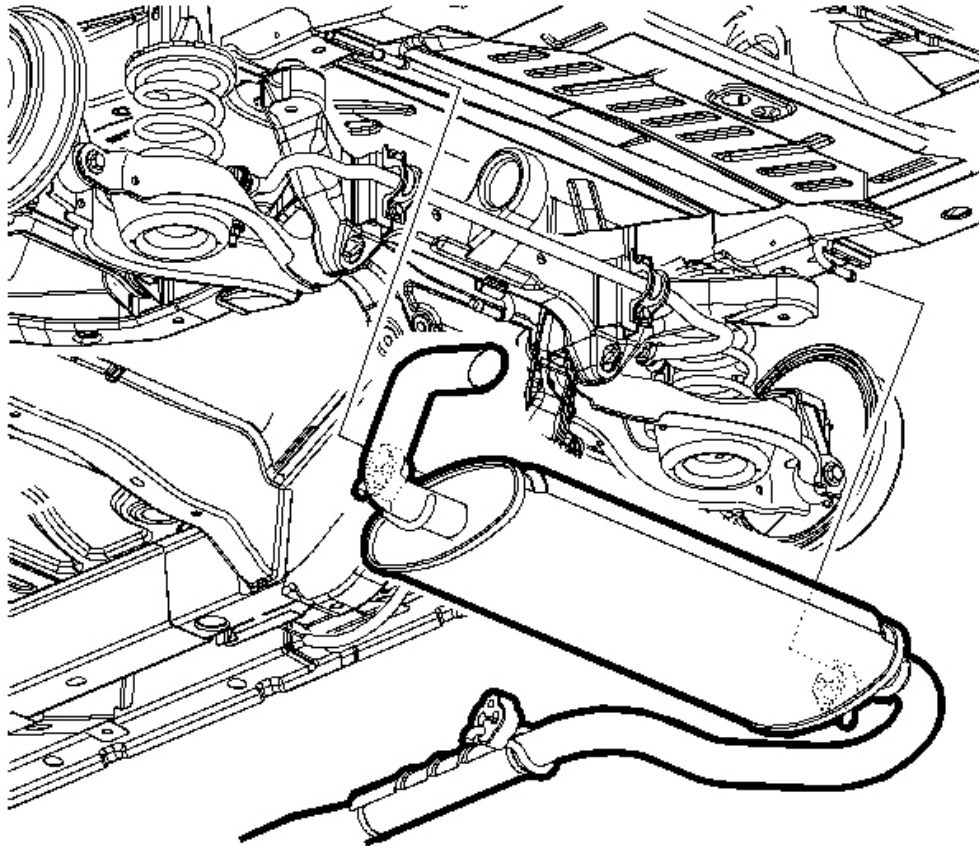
Installing Intermediate Pipe & Muffler Assembly
